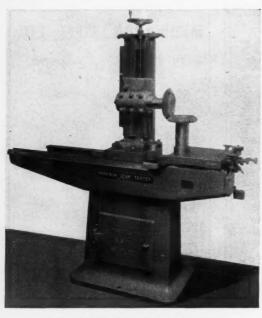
Parkson Gear Tester Set Up For Testing Bevel Gears.
